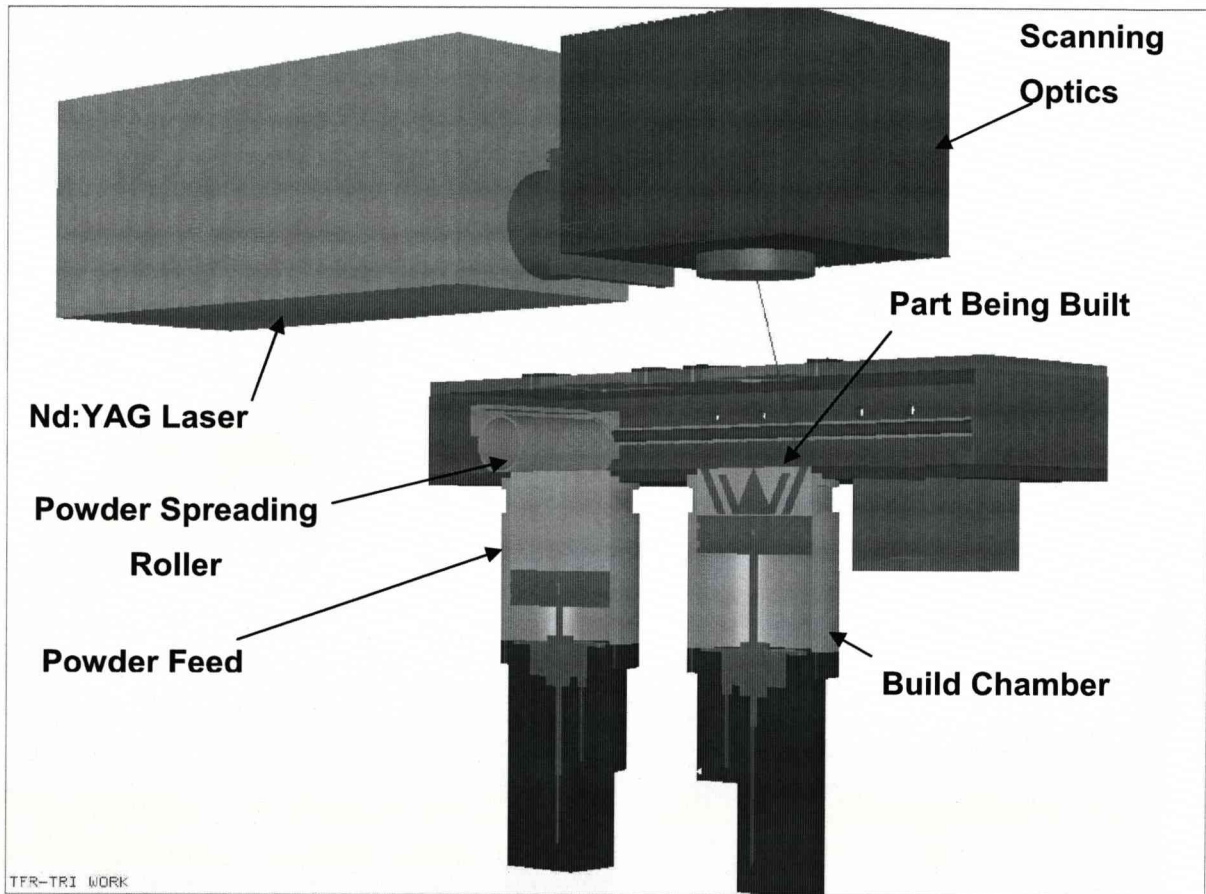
Sectioned view of DMLR build chamber (*drawing provided courtesy of R Morgan*)
